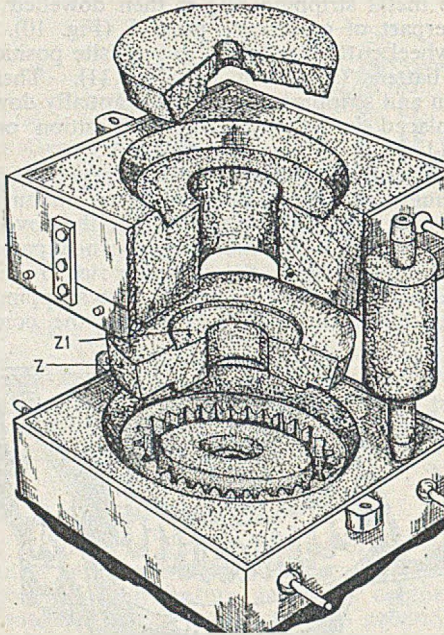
“Exploded” View of a Complete Set of Mould Components ready for assembly to make the Winding-drum Casting.
